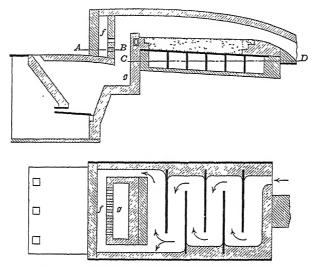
to 702.—Boëtius gas-producer and heating furnace.
